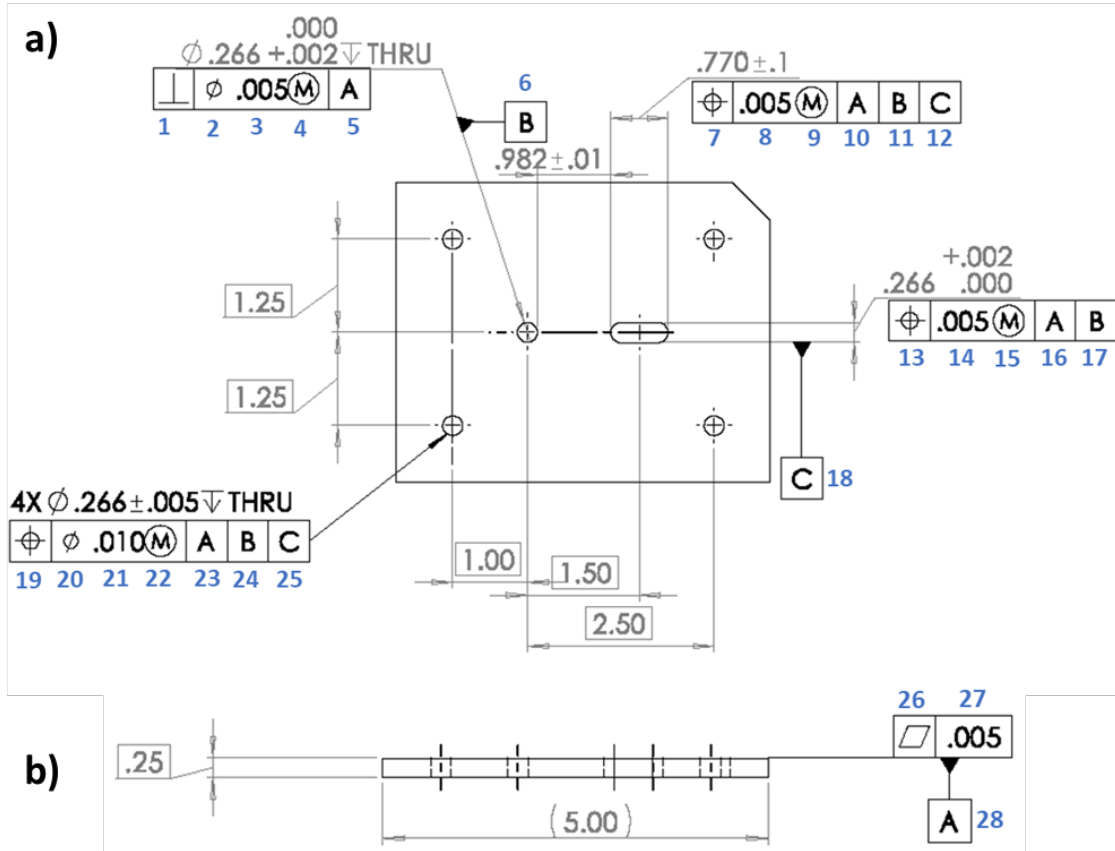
Activity part drawing solution of a) top view and b) front view with the labeled sections
